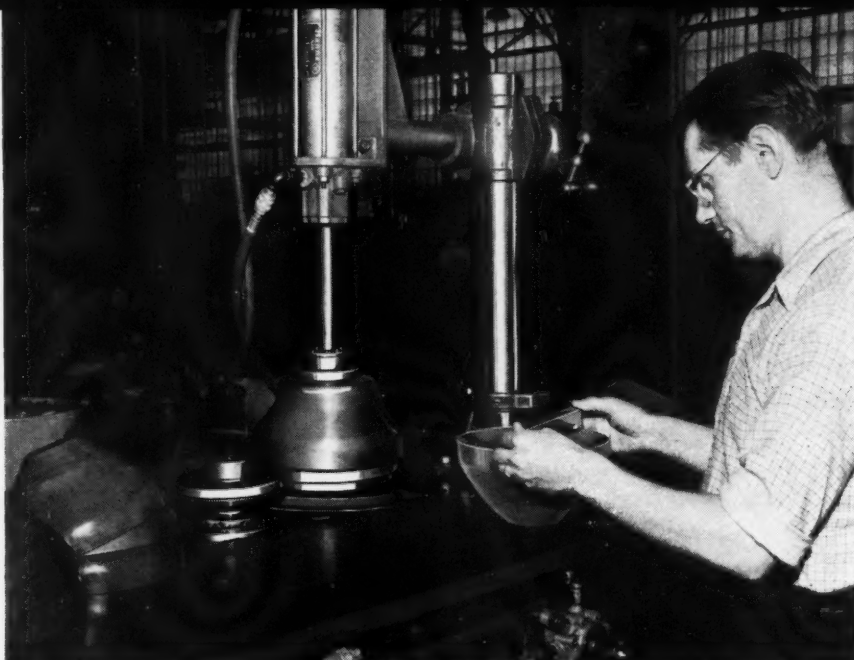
A stamping trimmer is used extensively for trimming deep-drawn parts, such as the flame-tube scoop
